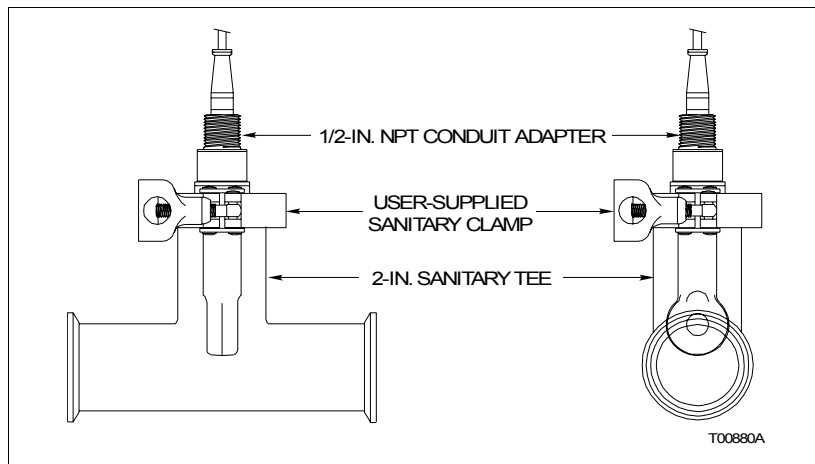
Sanitary In-Line Flow Assembly with Tri-Clamp
